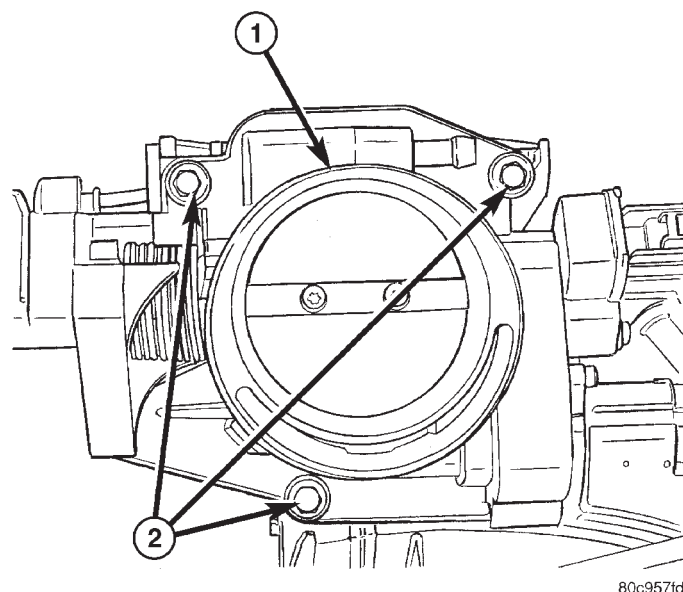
THROTTLE BODY MOUNTING BOLTS - 3.7L
